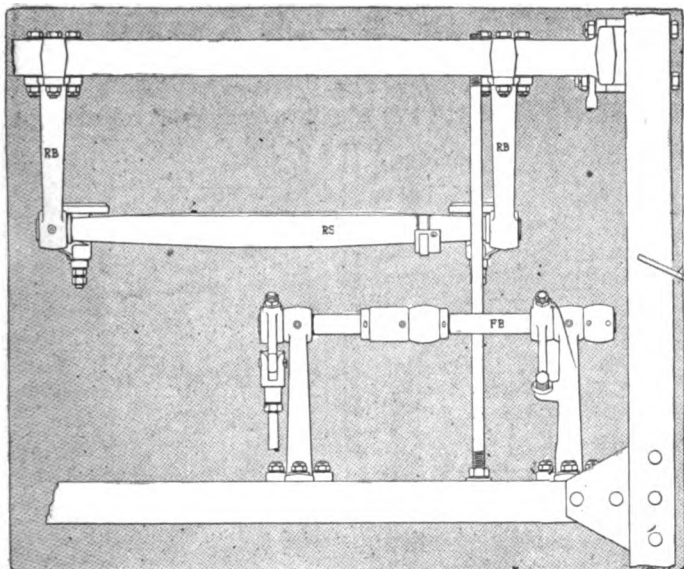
Method of supporting the clutch rocker shaft on the frame
